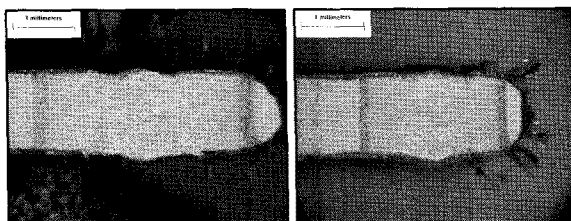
Fracture location of tensile test specimen according to heat input value.
